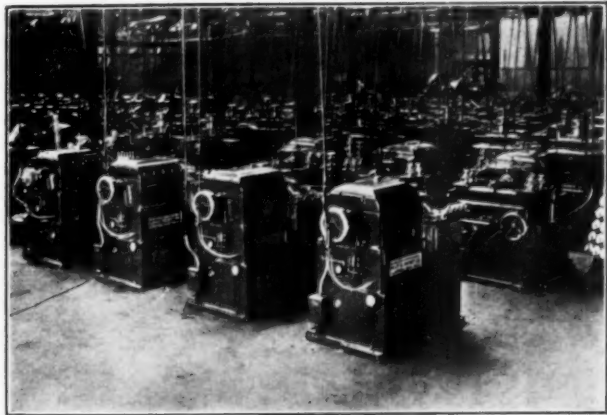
MACHINES IN CHRYSLER PLANT, NEWCASTLE, IND.
